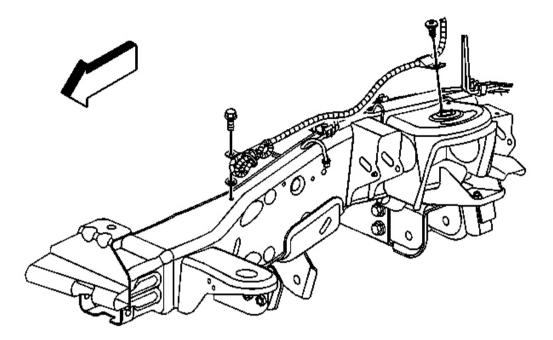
Engine Coolant Heater Cord Courtesy of GENERAL MOTORS CORP.
